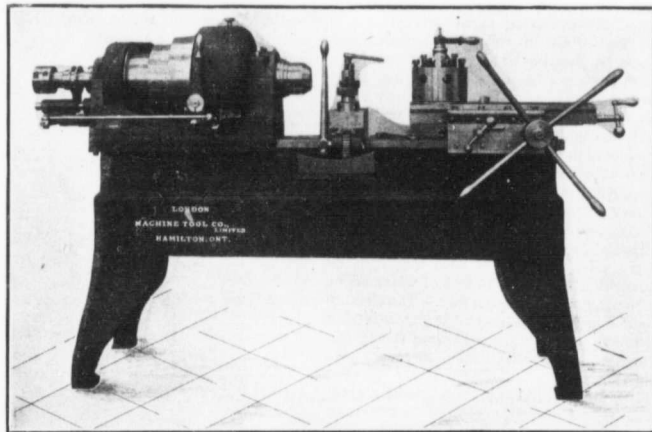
New Style London Machine Tool Brass Finishing Lathe.
